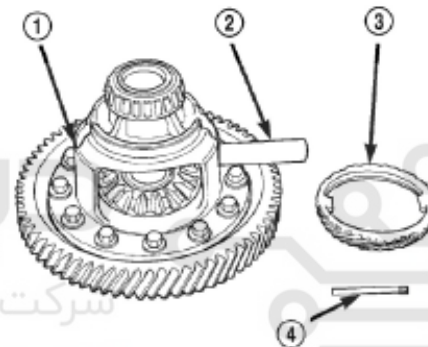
Disassembly of pinion, side gear and thrust washer
